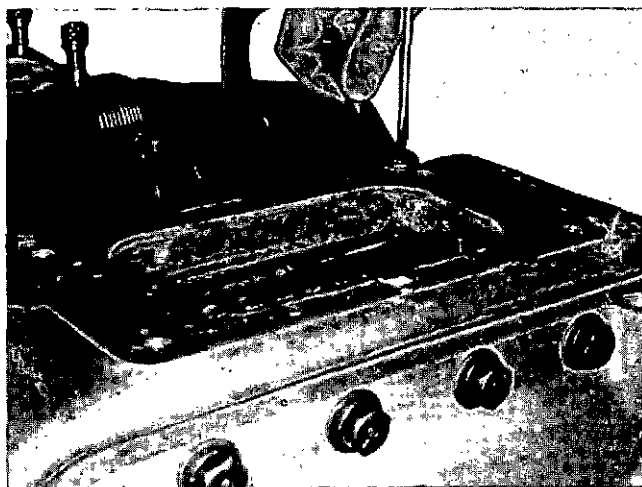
, V40824. Adjusting stabilizer screws
